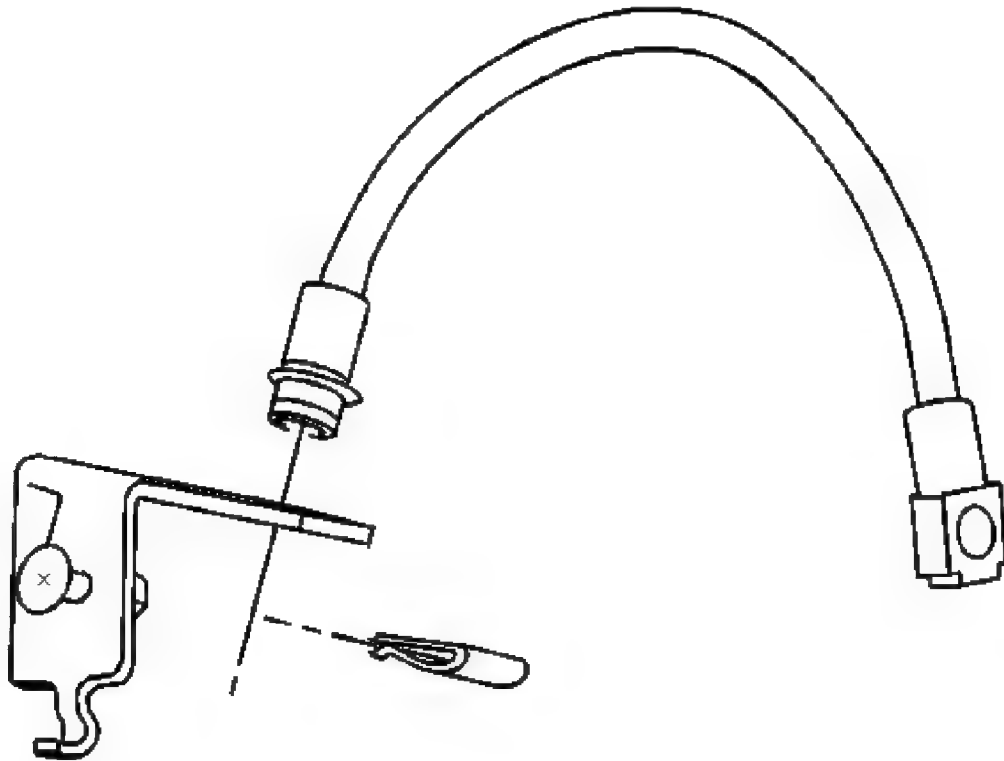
Removing/Installing Brake Hose From Brake Hose Bracket
